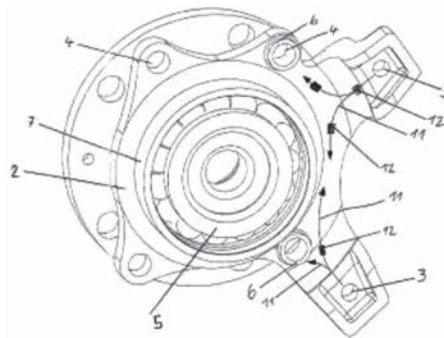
Wheel bearing estimating the braking force. Adapted from [292].
